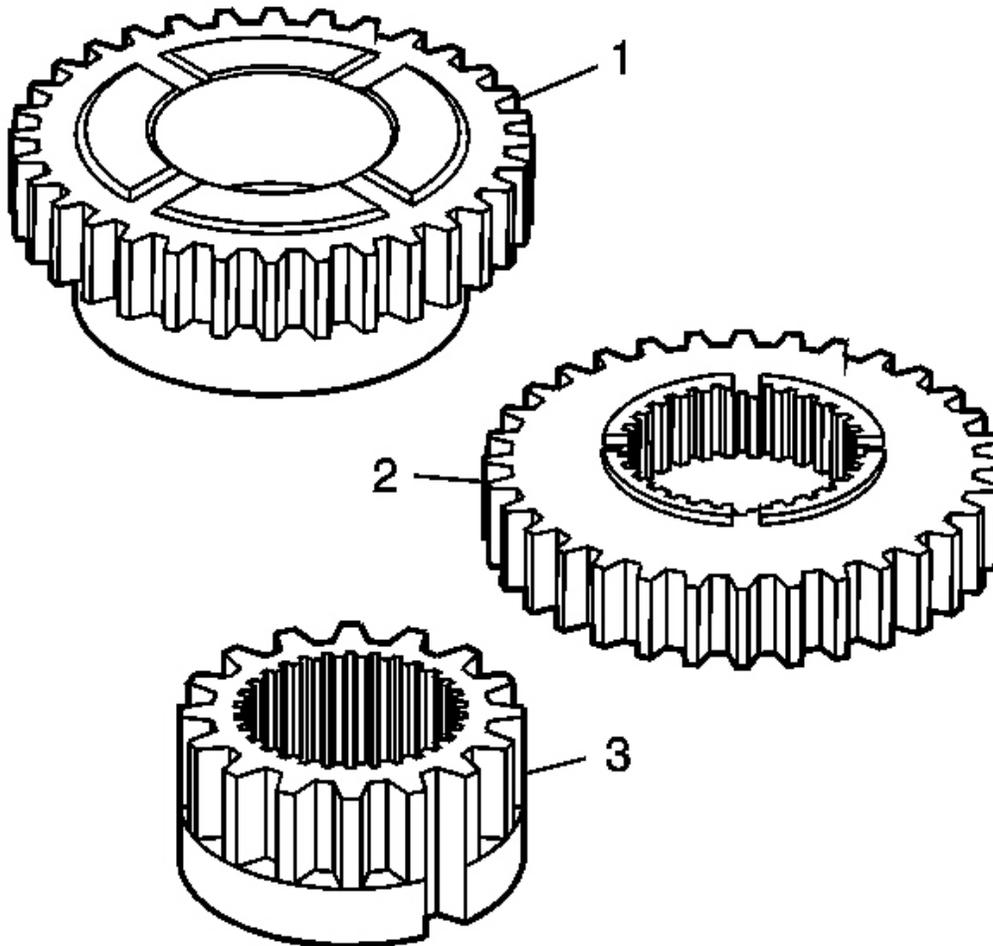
Identifying Front Sun Gear, Rear Sun Gear & Inner Lockup Hub
